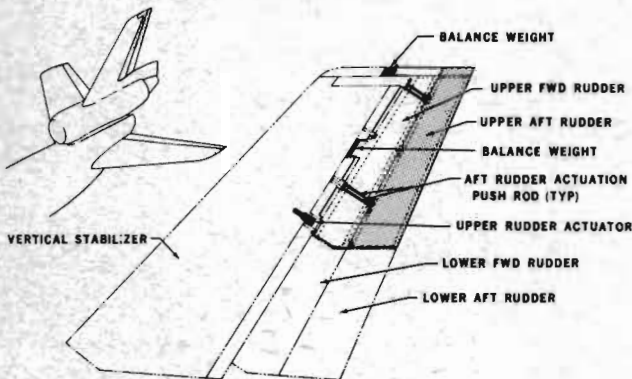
DC-10 UPPER AFT RUDDER ASSEMBLY
